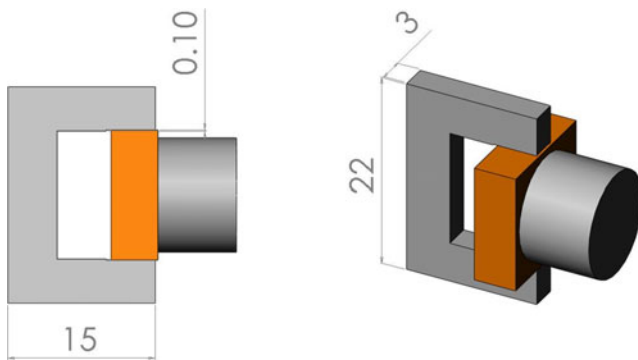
Schematic picture of the U-shape specimen and the tool. Units are in millimeters
